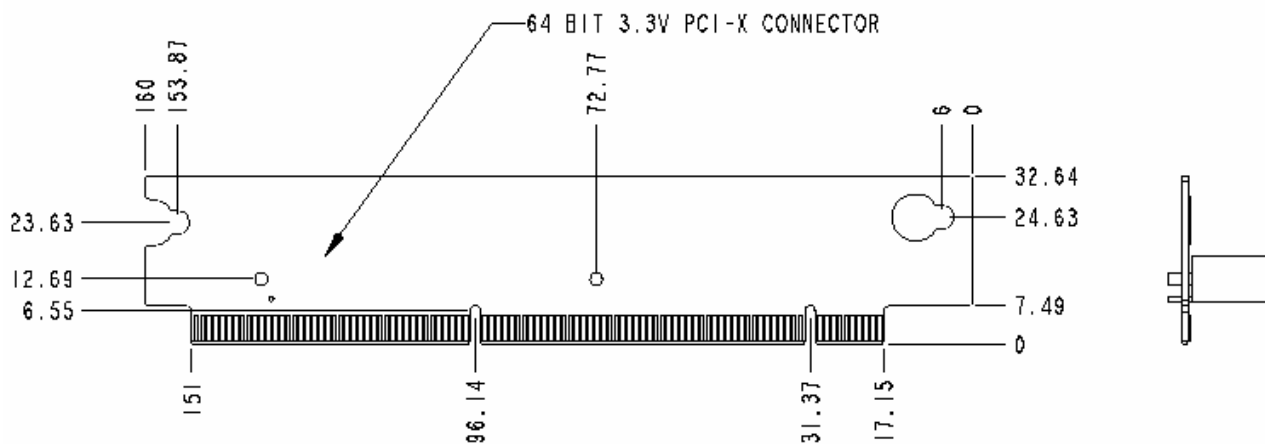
1U Low Profile PCI-X Riser Card Mechanical Drawing
